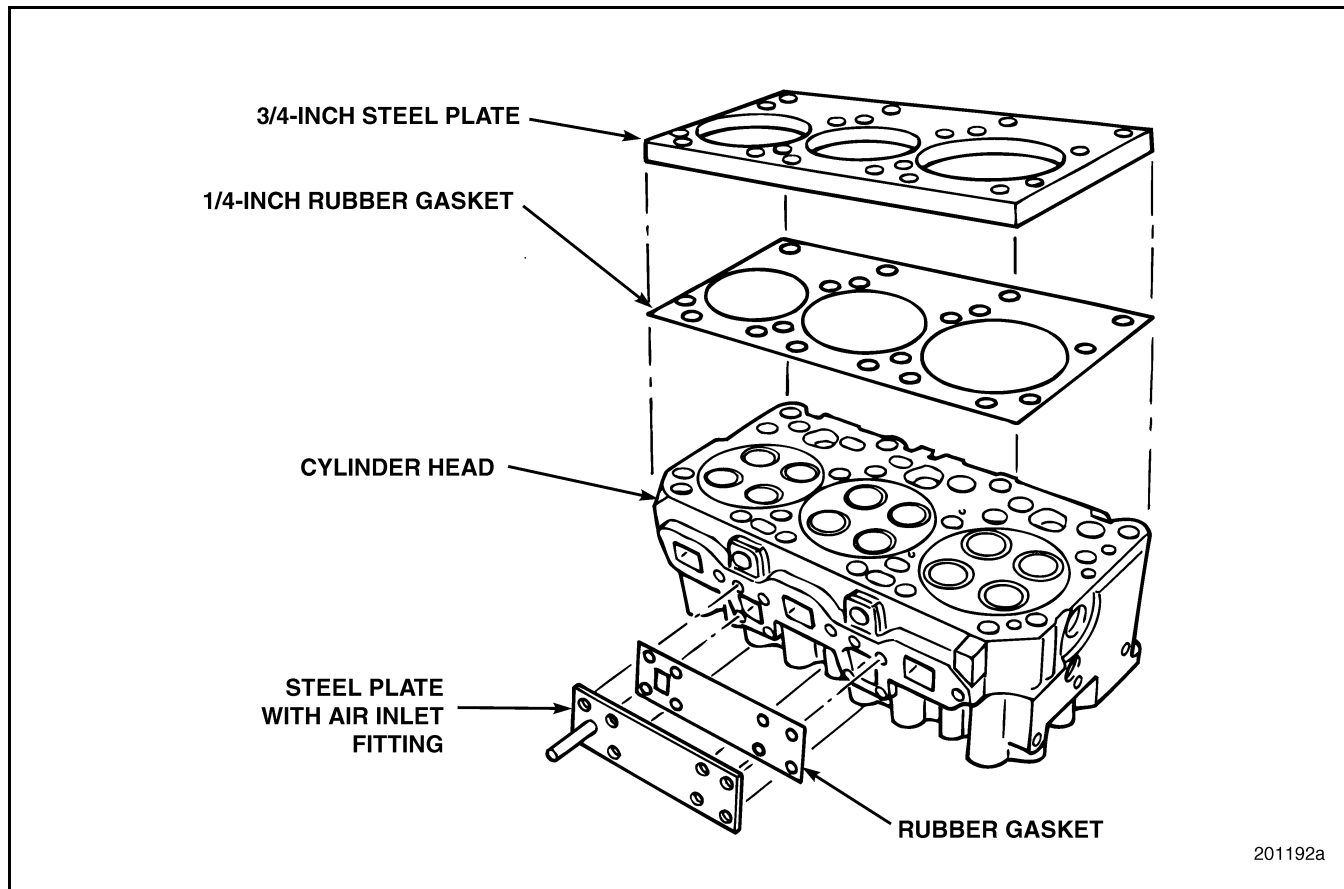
Cylinder Head Coolant Passage Leak Check (Out of Chassis)
